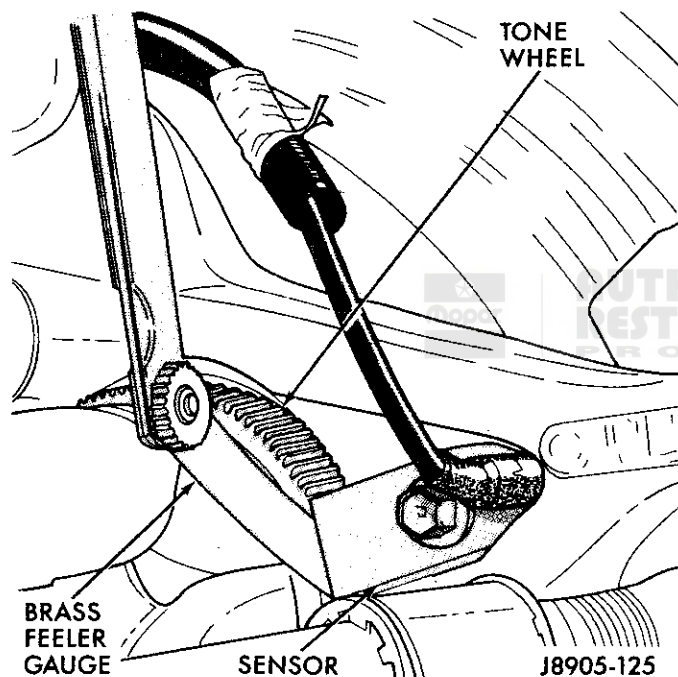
Adjusting Sensor-To-Tone Wheel Air Gap
